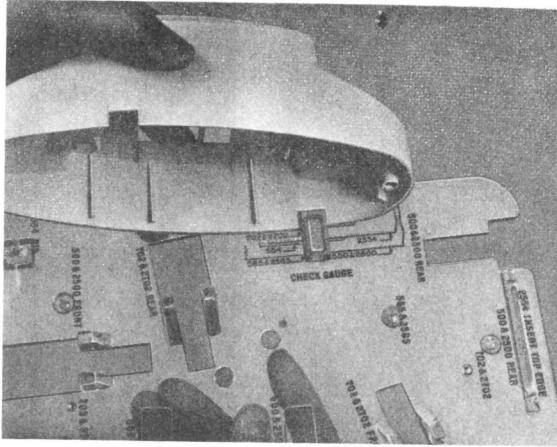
Notching 2702B1 Housing and Using Check Gauge
